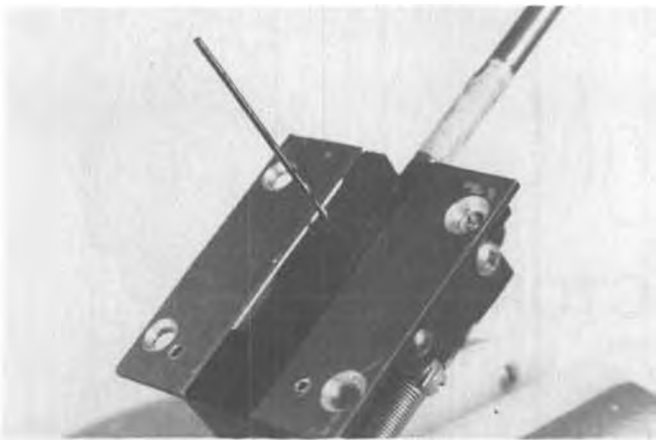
Drill holes just short of scribed line. Drill size selected so bolts will self-thread.
